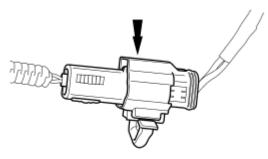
Locating Engine Wiring Harness Bracket And Nut Courtesy of FORD MOTOR CO.
